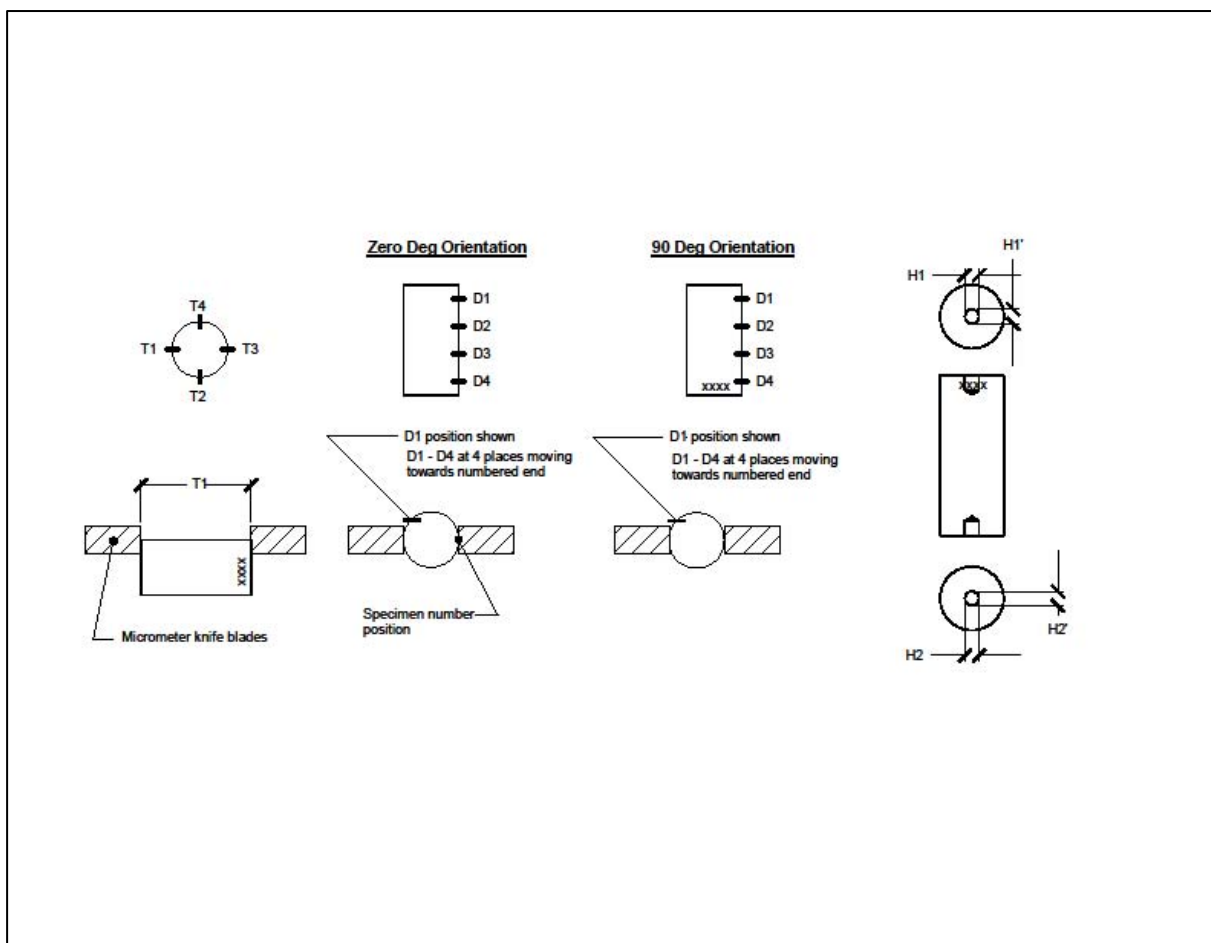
Measurement scheme employed for creep specimens (both initial and final dimensions)
